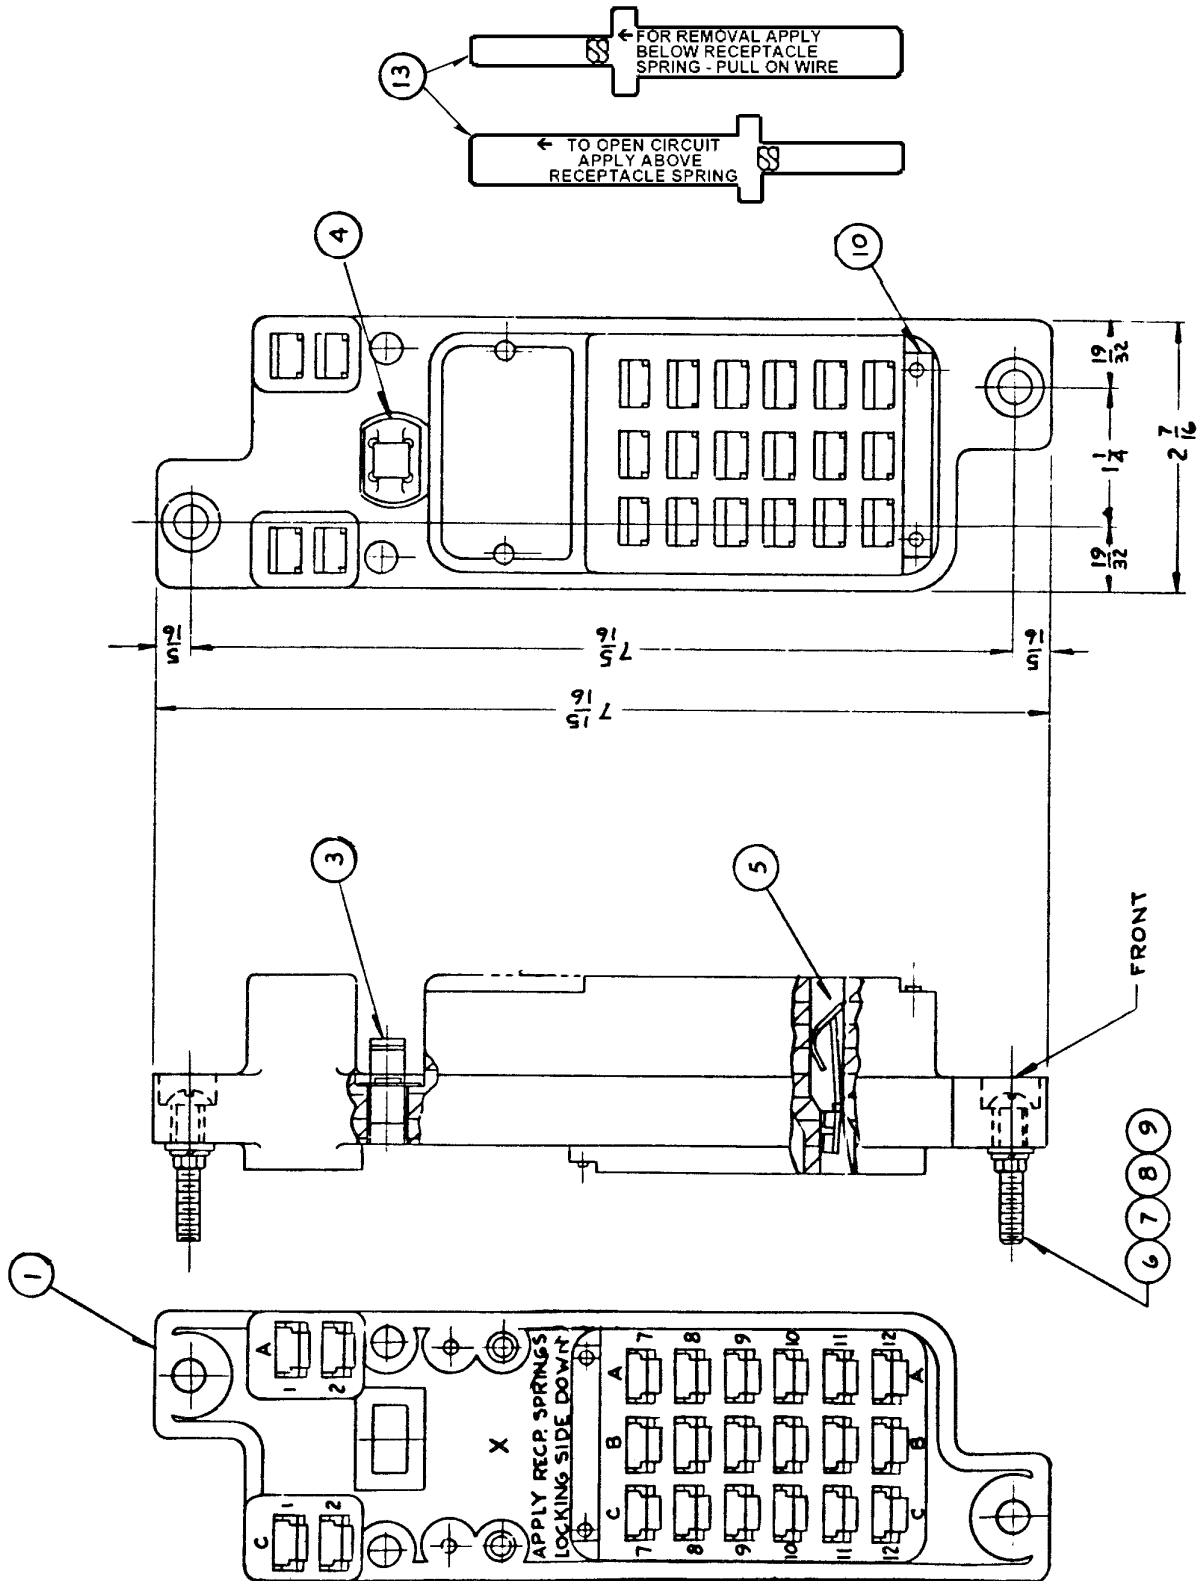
IMPROVED MOUNTING BASE FOR PN-150BM RELAYS
